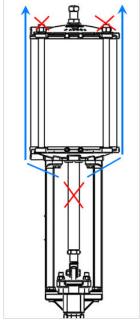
Knife Gate Valve with Pneumatic Cylinder Actuator, Vertical Lifting
